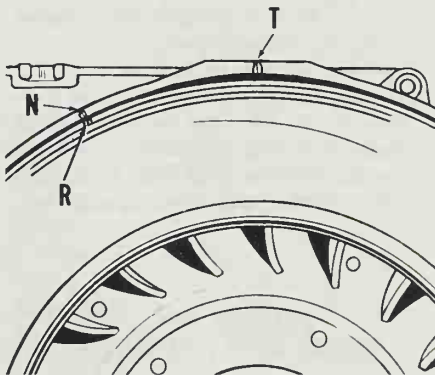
Number 1 cylinder fuel injection should occur when flywheel reference mark (R) is aligned with crankcase mark (N). Number 1 piston is at top dead center when flywheel reference mark (R) is aligned with crankcase mark (T).
